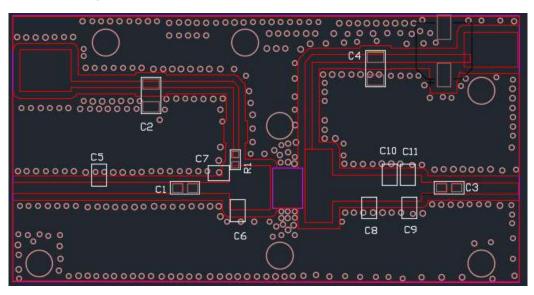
test fixture ,BOM and layout (Layout file upon request,)
